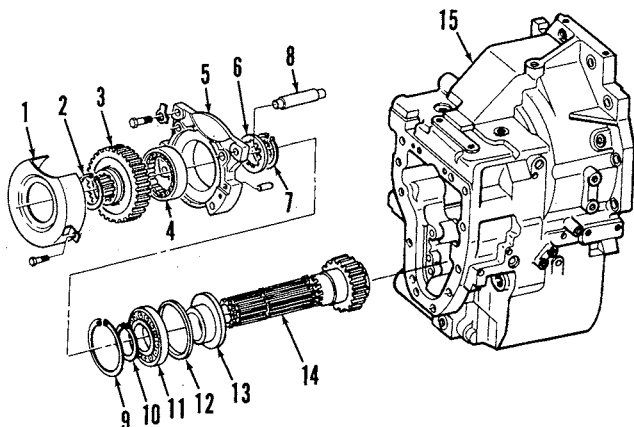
Exploded view of mechanical front-wheel drive intermediate drive shaft and gear used on models equipped with Quad-Range transmission.
